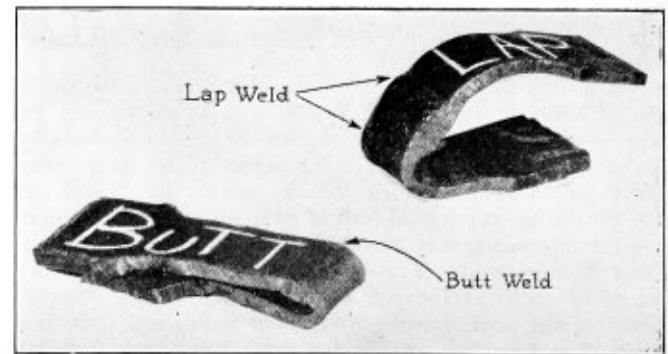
Butt Weld Here Shows Greater Strength Than Lap Weld
